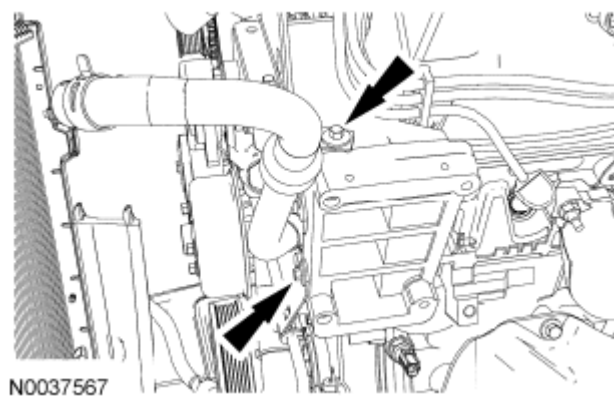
Locating Power Steering Reservoir-To-Power Steering Pump Supply Hose Bracket Bolts
